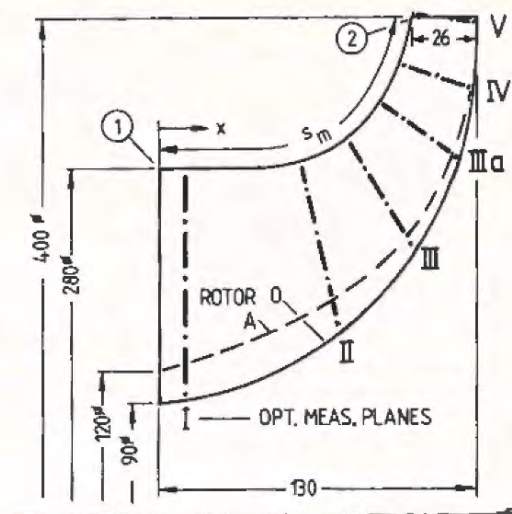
Meridional impeller shapes with L2F measuring planes, dimensions in mm
